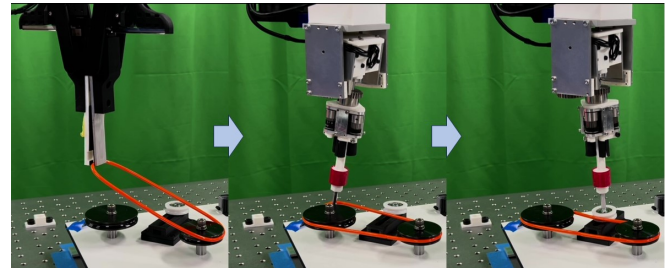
Overall robot system and belt drive appearance. Assemble the belt drive with simple force feedback control by flexible mechanisms.
